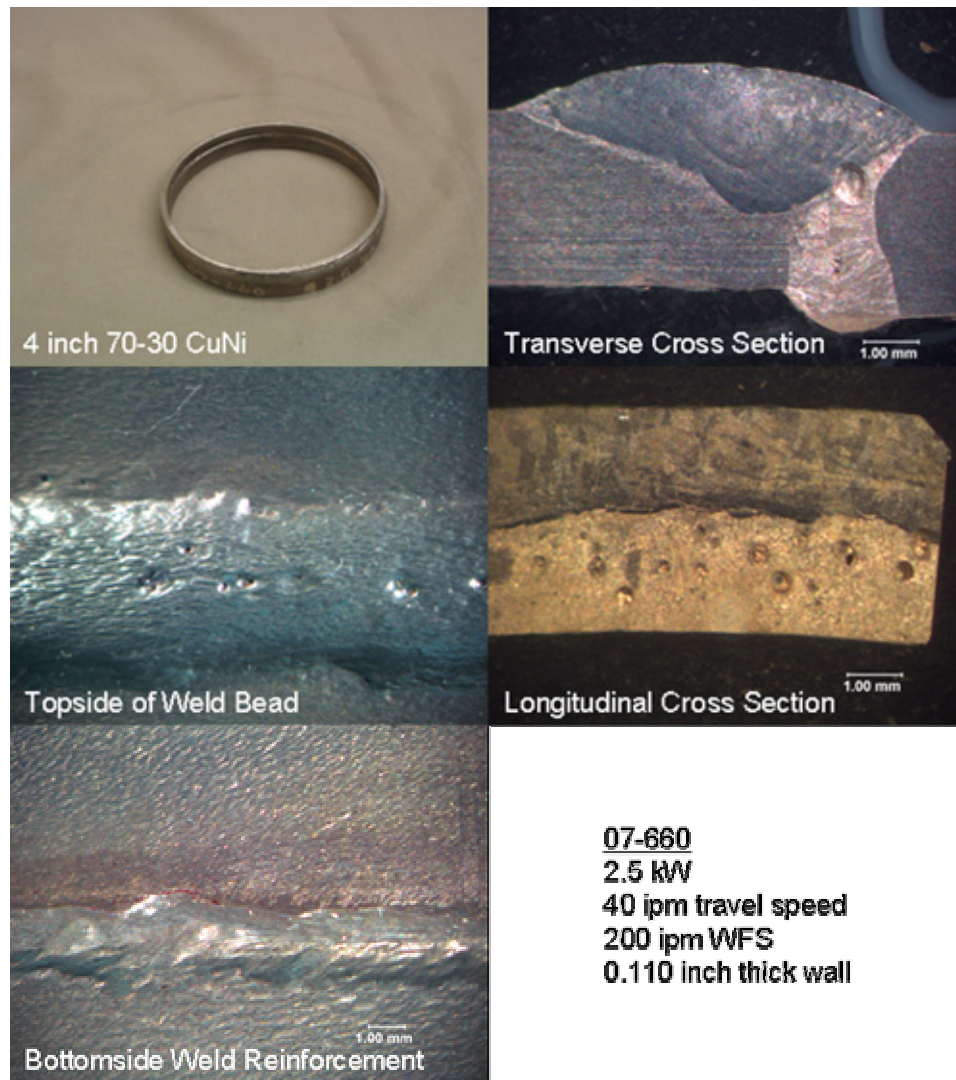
Tandem hybrid weld of 4 inch 70-30 CuNi pipe.
